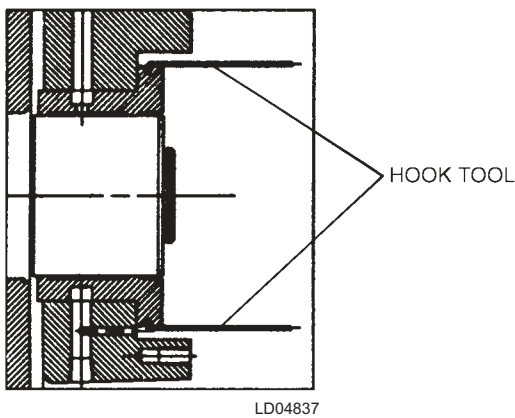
FRONT LOW-SPEED BEARING REMOVAL
